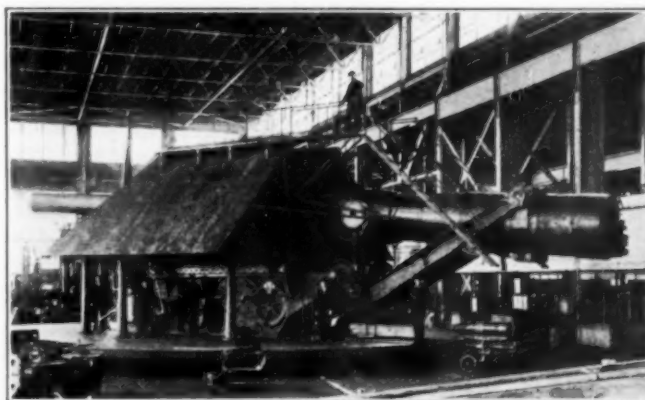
16-IN. DISAPPEARING CARRIAGE, LOADING POSITION
